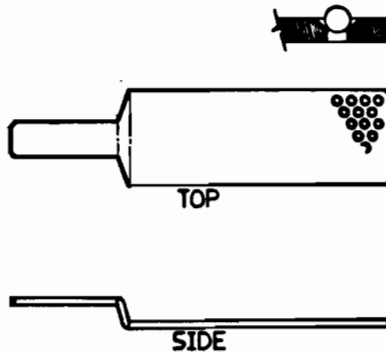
Bead Paddle. The illustration shows a sketch of how a paddle could be constructed. Drill holes slightly smaller than the size of the beads.
